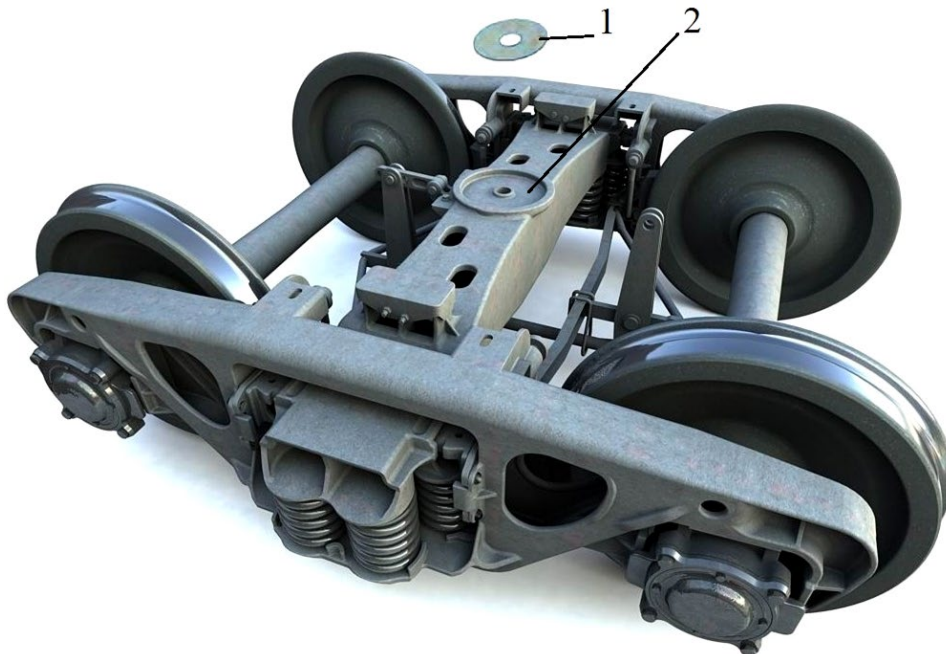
Pivot assembly of the rolling stock: 1 — replaceable disk; 2 — frame with a center plate
